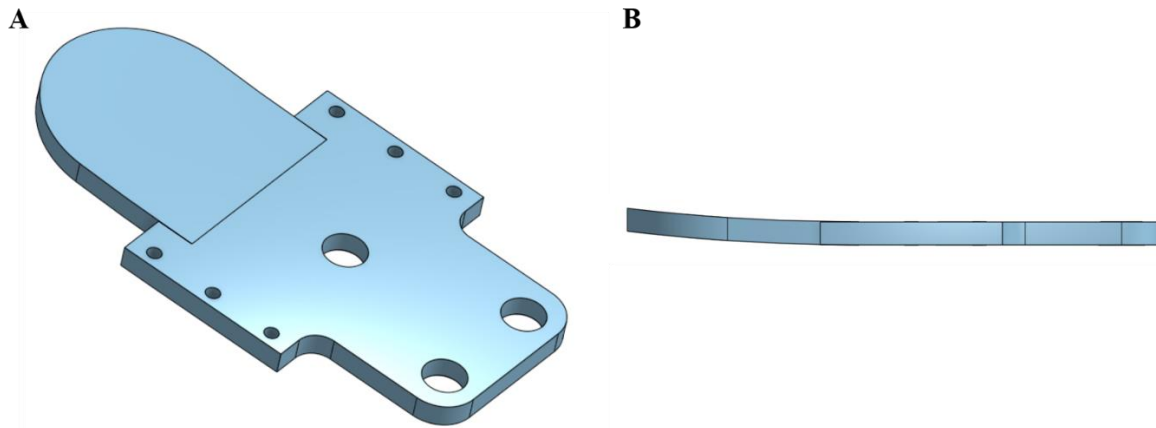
Solid models of the lever arm mounting plate. A) An isometric view showing large holes to mount to the foot and smaller holes for lever arm mounting.
